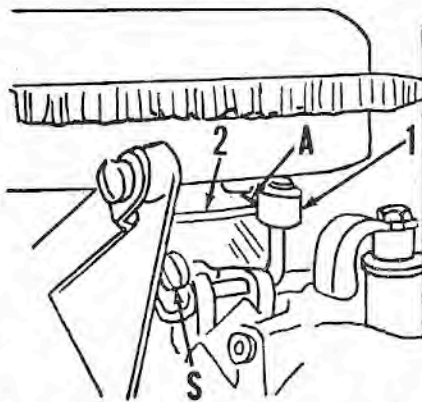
Schematic view of throttle linkage showing adjustments. Refer to text.
